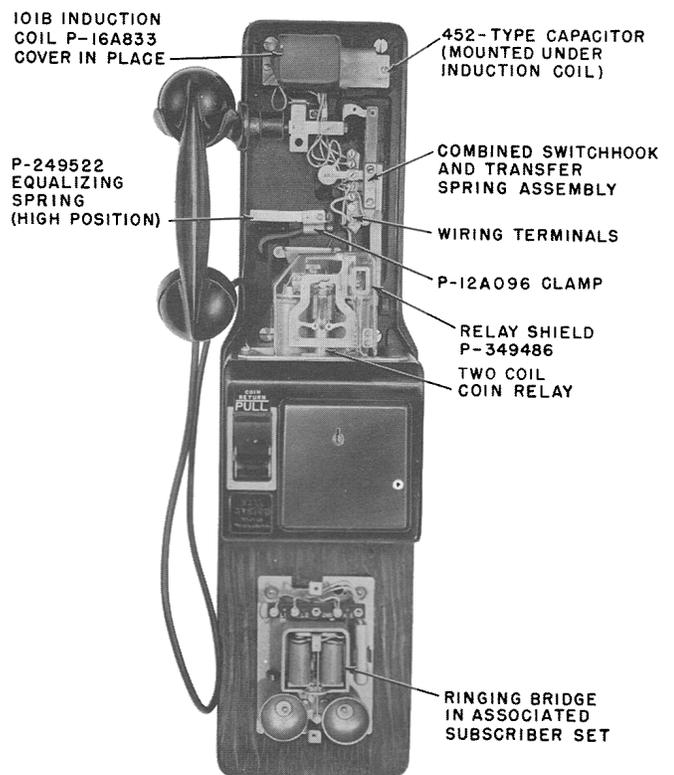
Combined Assembly — With Induction Coil and Capacitor
